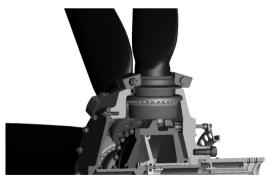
Cross-section of CAD model of the typical design of the propeller hub with indicated type of the shape lock in the blade root.
